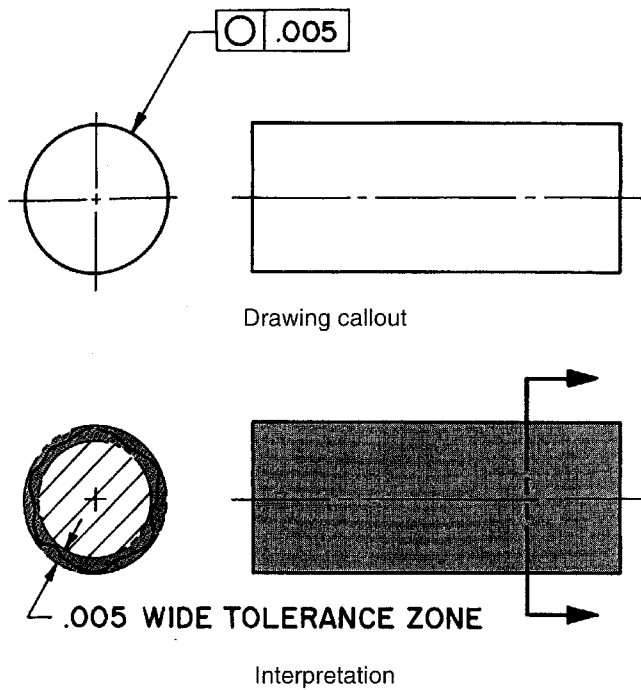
A circularity geometric tolerance specifies a tolerance zone bounded by two concentric circles on a plane perpendicular to the axis of a cylinder or cone, within which each circular element must lie.
